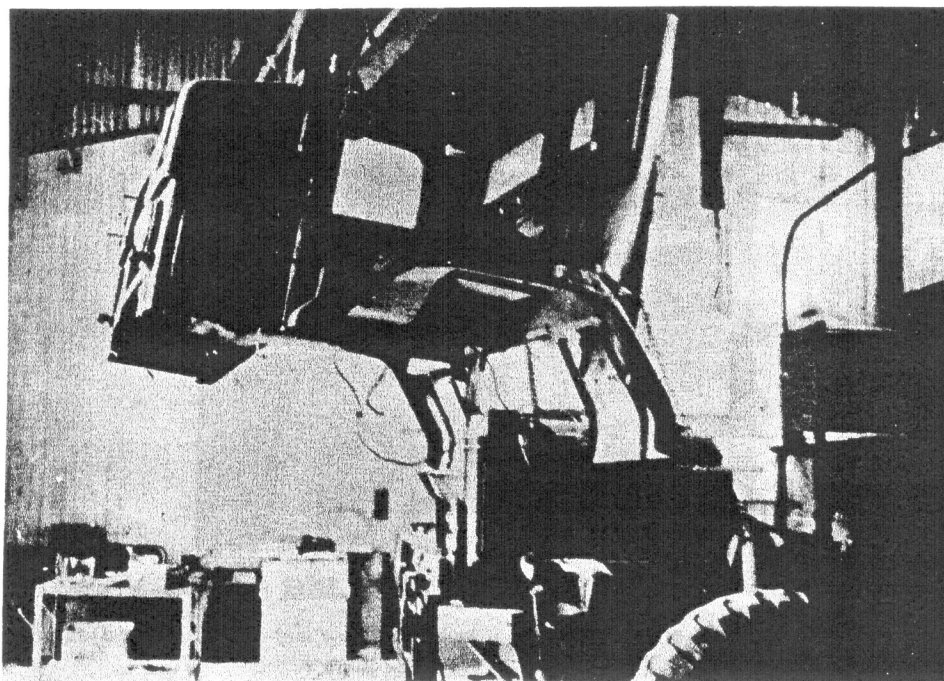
LIFTING BOARD AND SLING - SIDE VIEW
